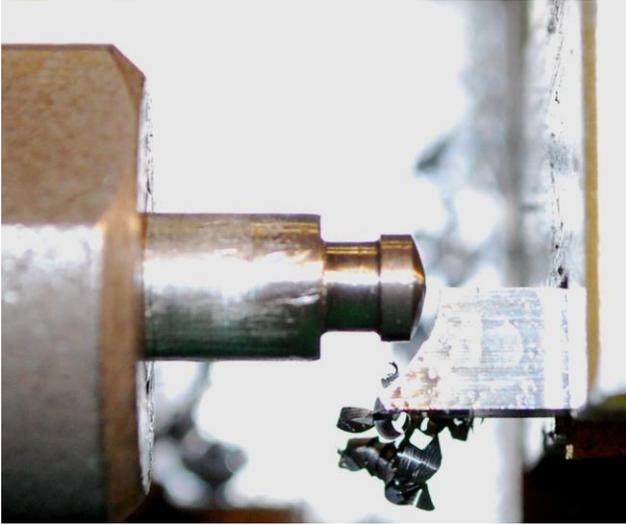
A short piece of rod holds the screw while a profile tool is used to curve the head.
